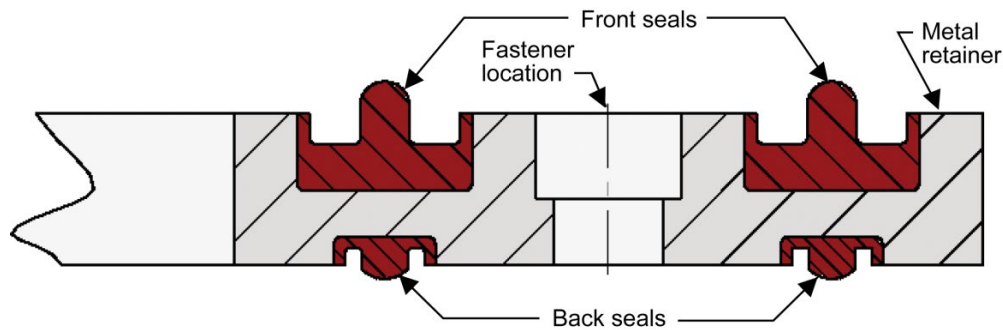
Cross section through Gask-O-seal showing silicone seals molded into grooves on front and back surfaces of metal retainer.
